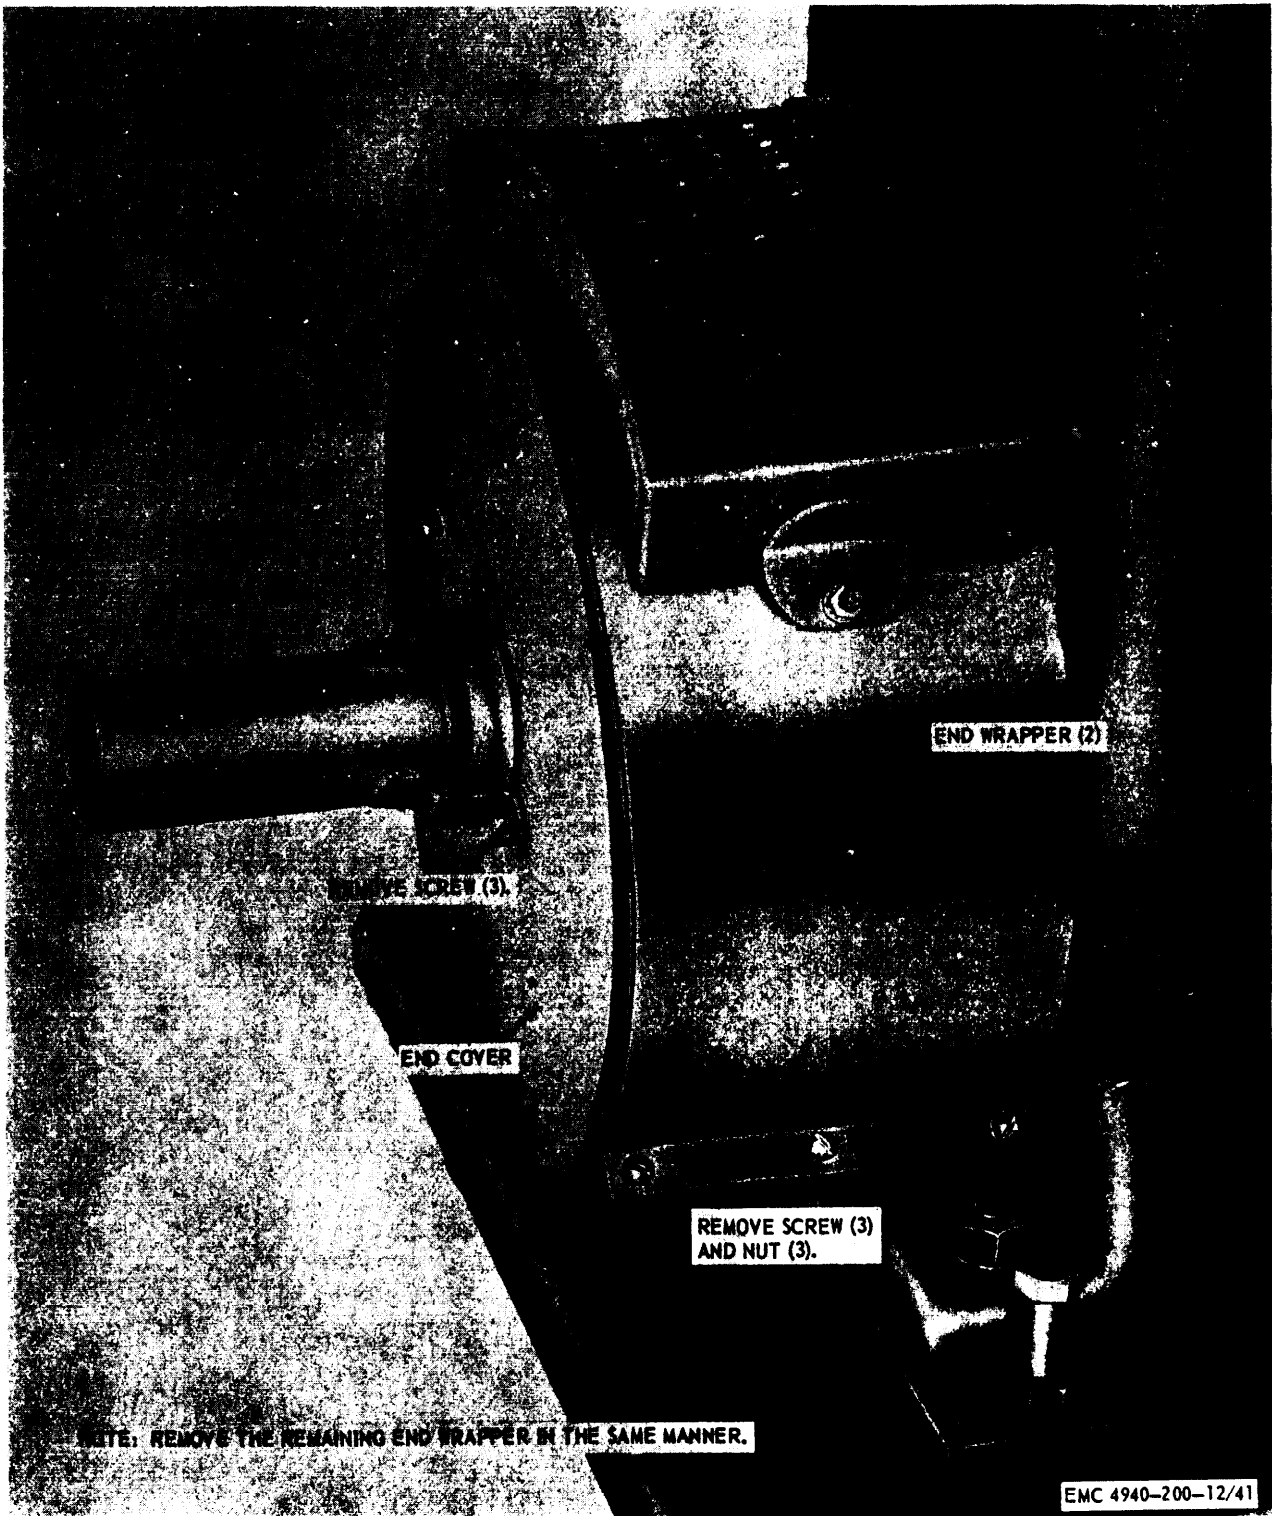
End wrappers, shaft guard, and end cover, Model SECM, removal and installation.
